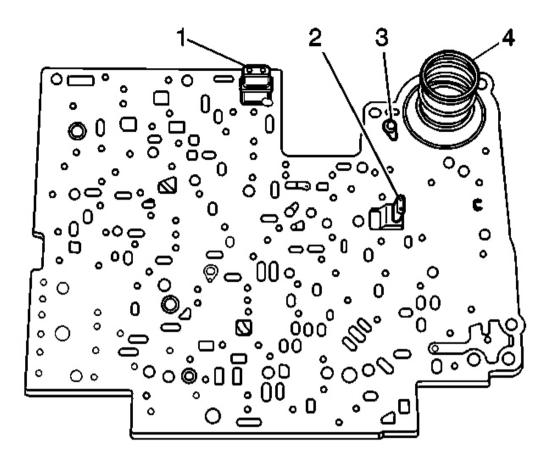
Installing Spacer Plate Components Courtesy of GENERAL MOTORS CORP.
